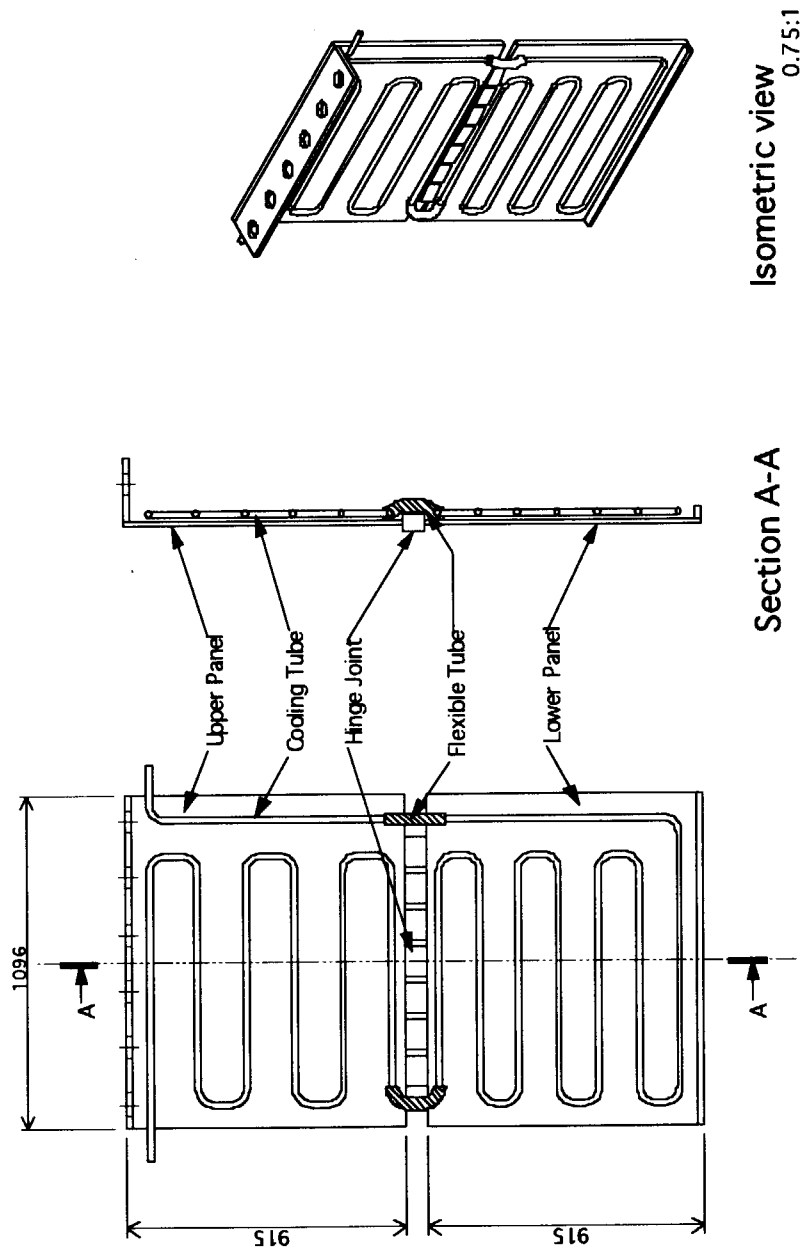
Schematic Drawing of Thermal Shield Panel
